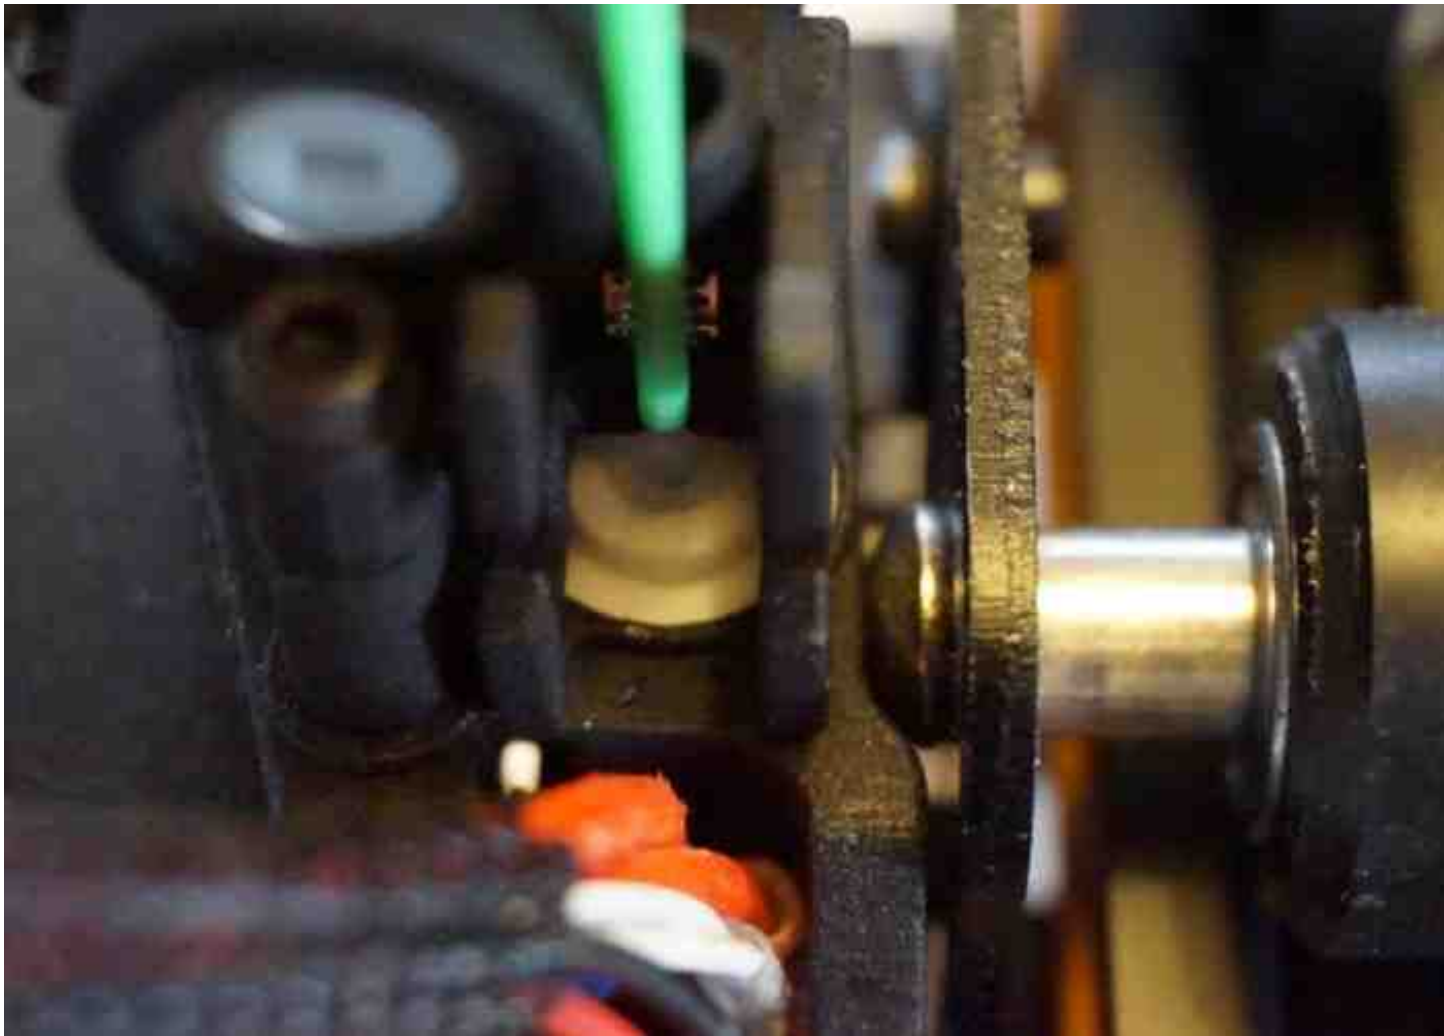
Insert the filament into the PTFE tube inside the Sidewinder.
